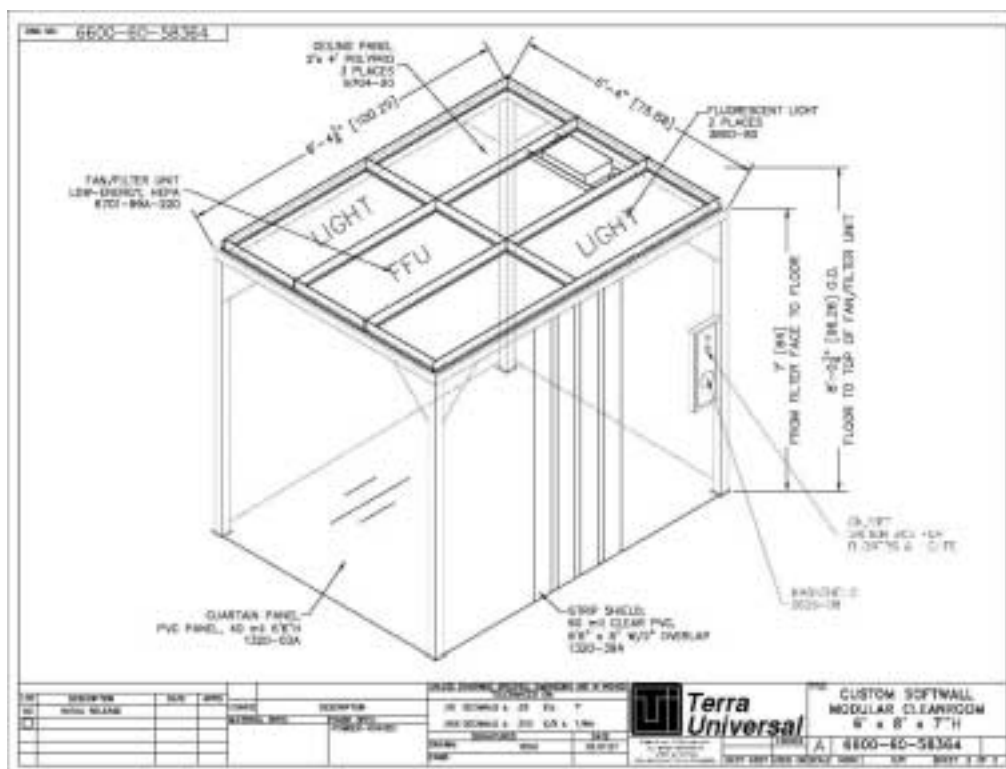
3-D drawing of the enclosure. Note: as built the control box and entrance will be on the short side rather than the long one.
